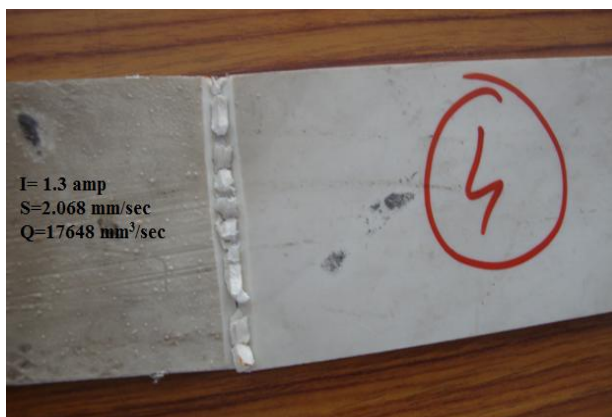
Weld bead formed in 4<sup>th</sup> experiment
